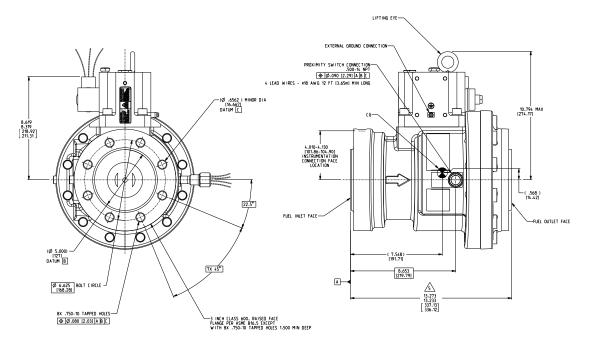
GSOV80 Flying Leads Version Outline Drawing (Side A)
